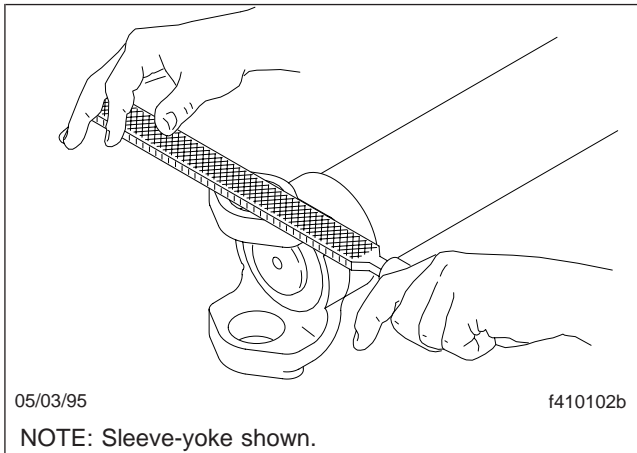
, Removing Burrs From the Machined Surface of a Full-Round Yoke Lug
